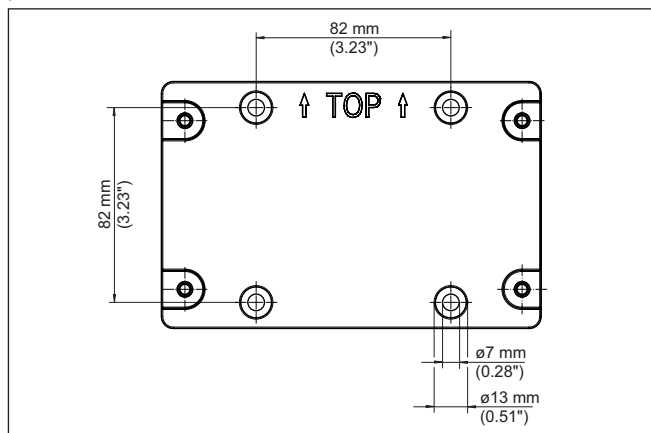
Mounting plate for wall mounting VEGAMET Air 841
